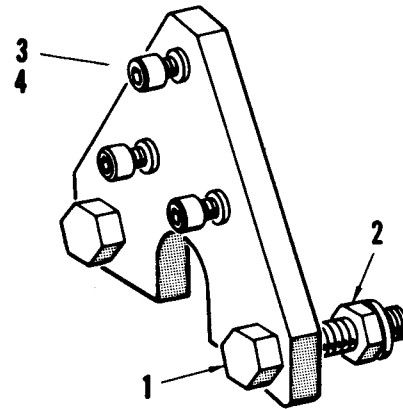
Vibration Transducer Combustion Flange Adapter Assembly.
